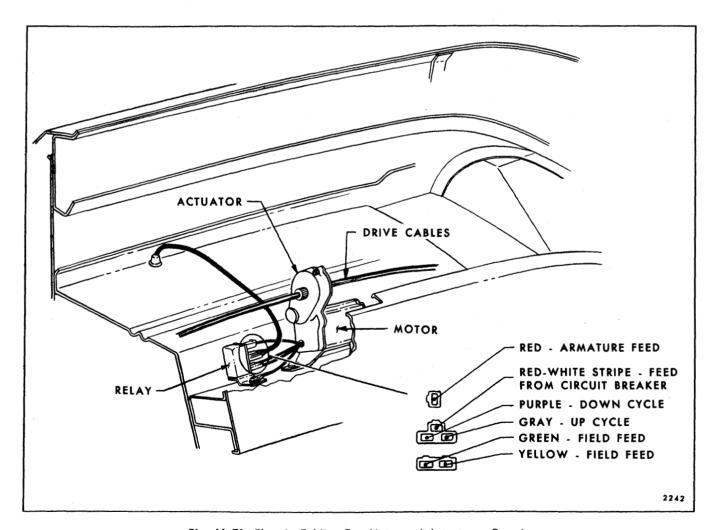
Electric Folding Top Motor and Actuator - Corvair
